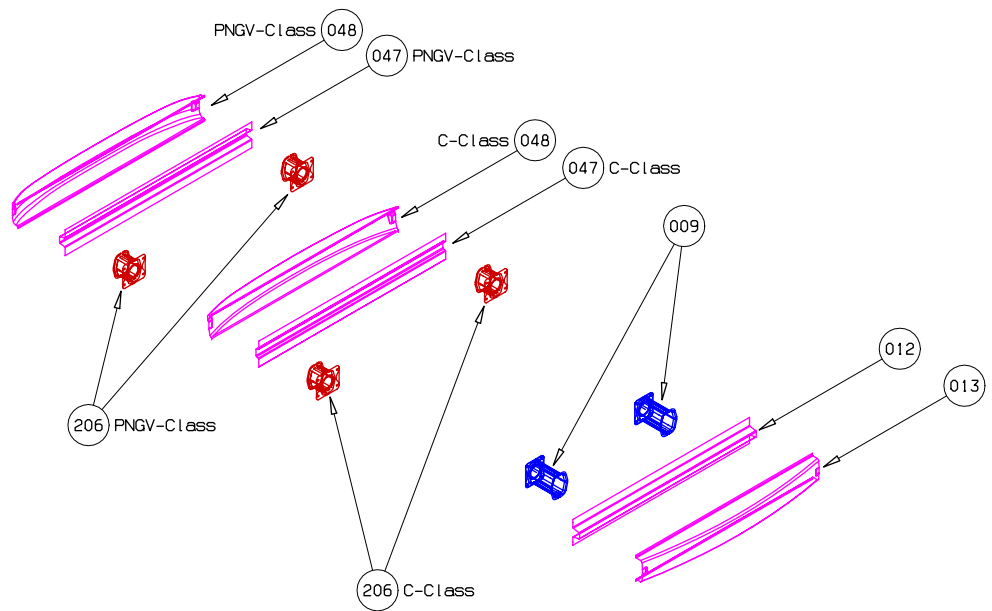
Exploded view Bumper Beam Structure illustrating steel grade
